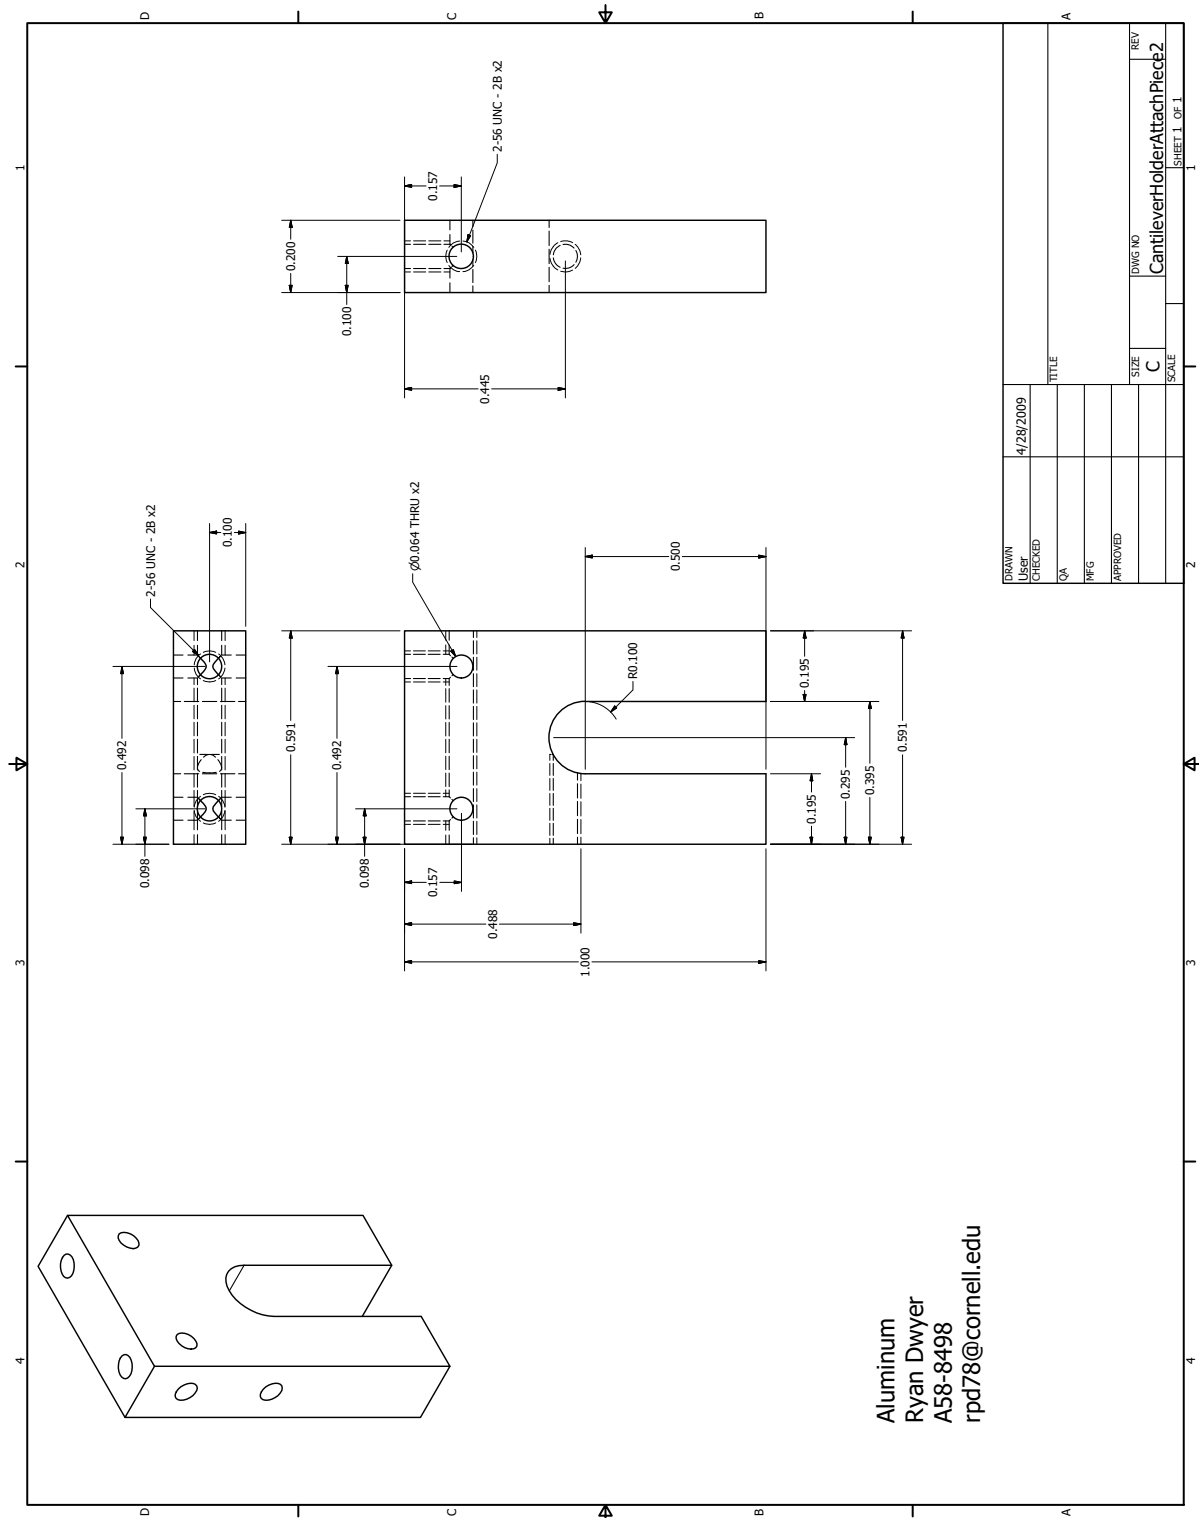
Perpendicular cantilever holder sliding drawer piece.
